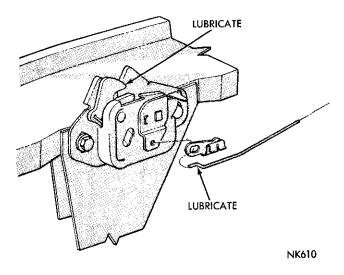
Hood Lock Assembly (AC-1, AC-2, AC-3 Models)
